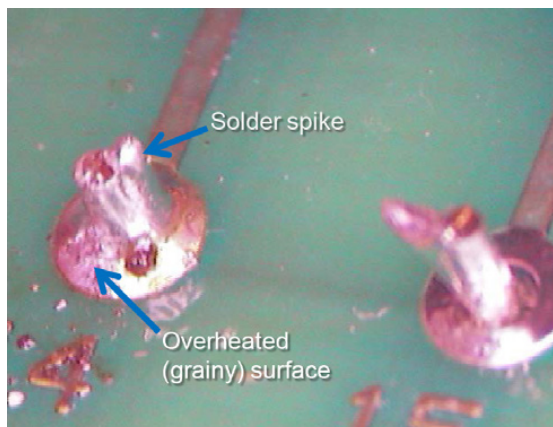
Example of an overheated joint with a solder spike, seen from the soldered fillet side of the circuit board (60% tin-40% lead external liquid flux, joint K14).
